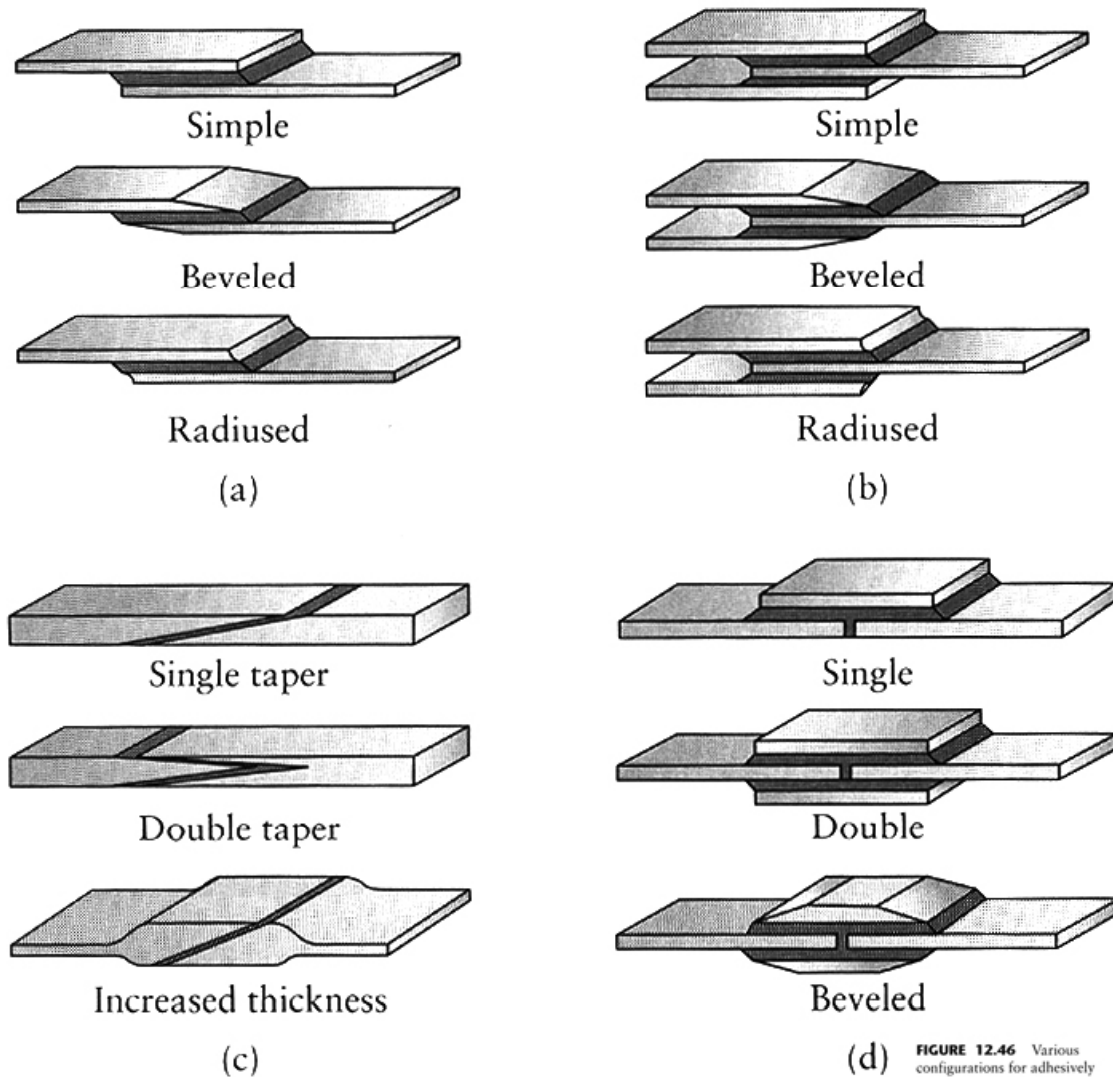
Various configurations for adhesively bonded joints: (a) single lap, (b) double lap, (c) scarf, and (d) strap.
